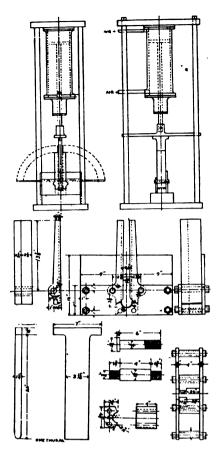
AN AIR MACHINE USED AT ALTOONA SHOPS
